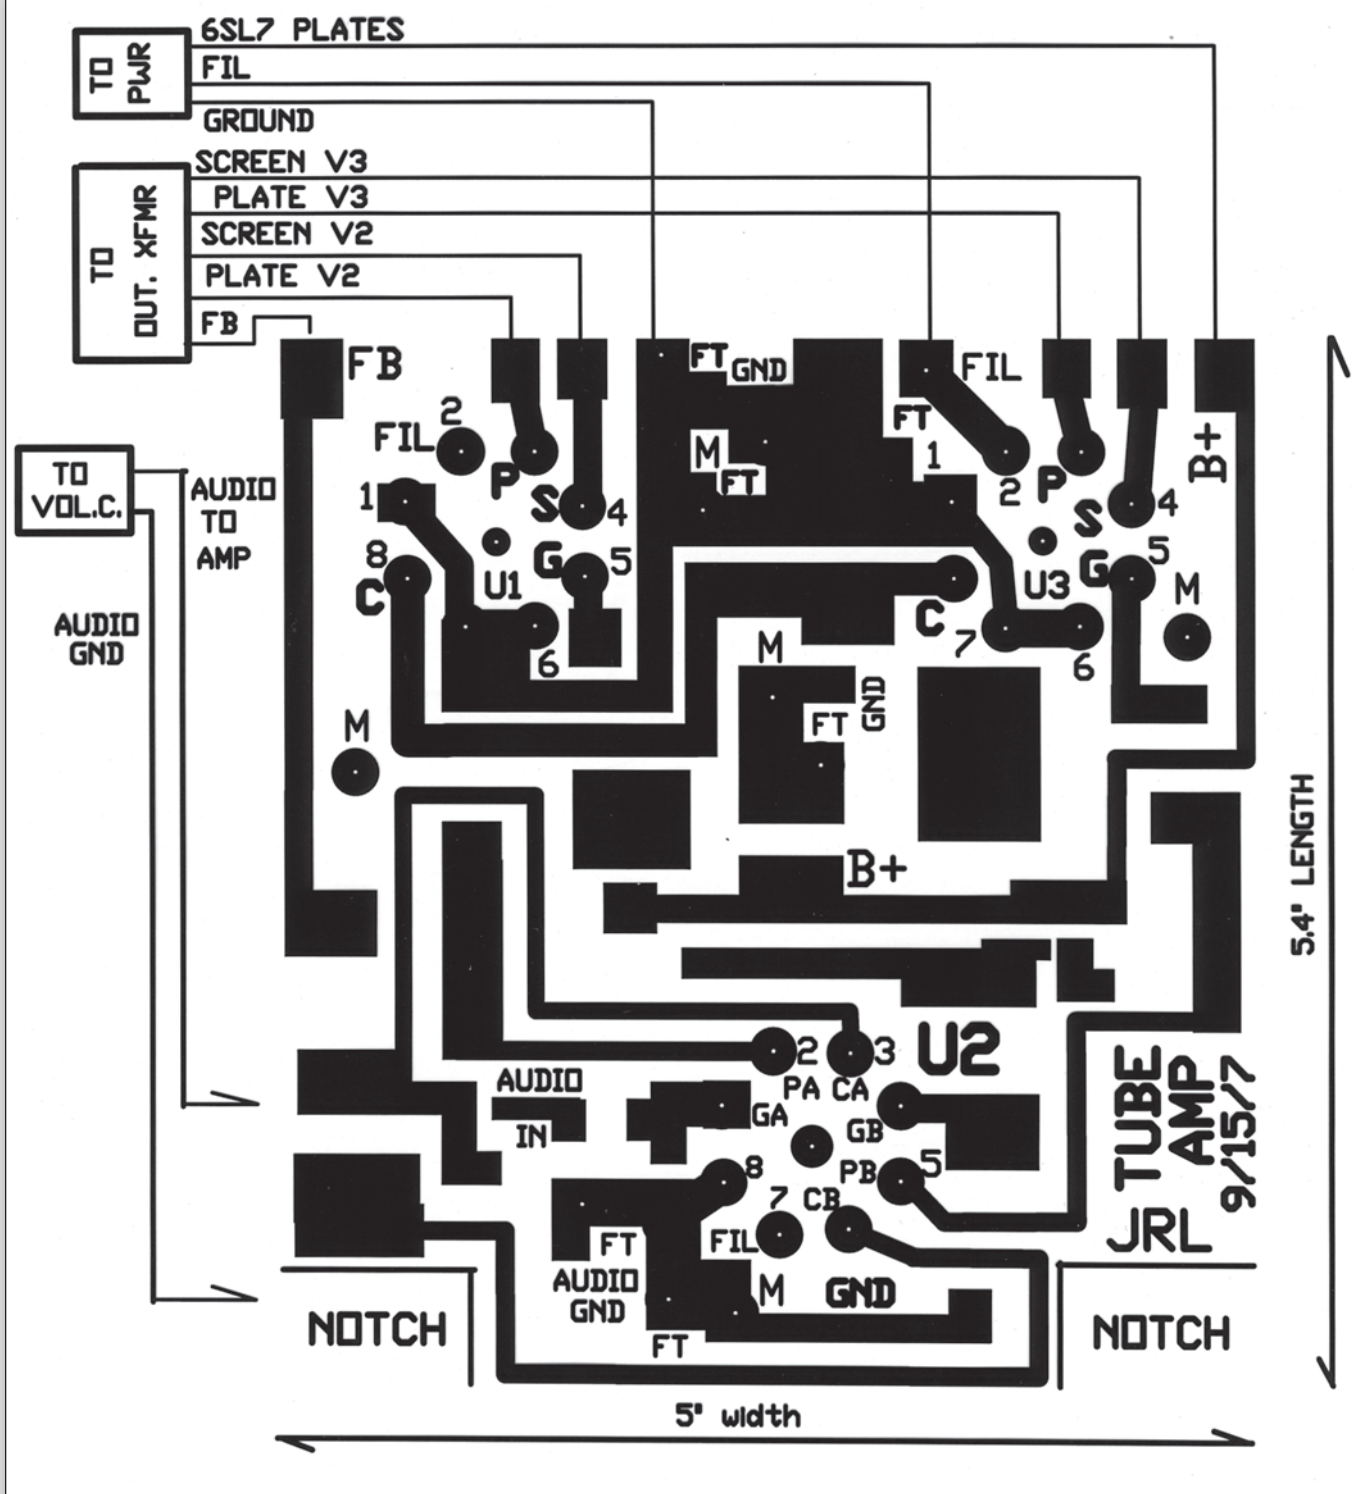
FIGURE B: Bottom layer, with parts surface-mounted on bottom, except tube sockets, which are on top.
